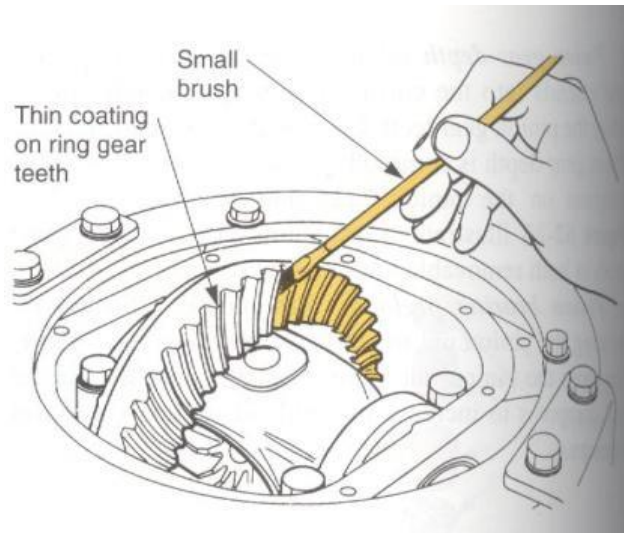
To check contact between the pinion gear and ring gear, coat the ring gear teeth with an approved substance; white grease, hydrated ferric oxide, etc. Turn the ring gear one way and then the other to rub the teeth together, producing the contact pattern.
